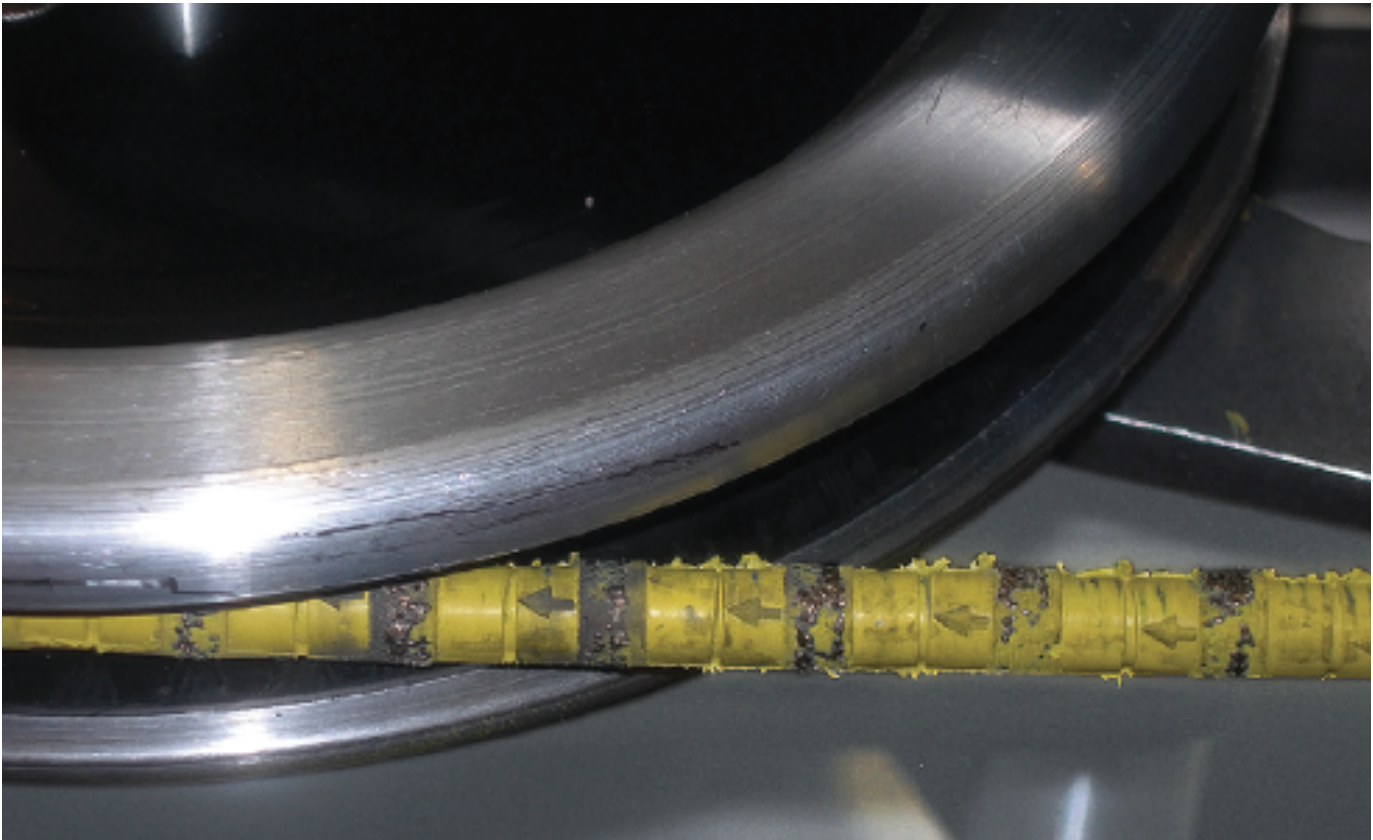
One of the hottest technologies in cold cutting is abrasive cutting diamond wire saws.
